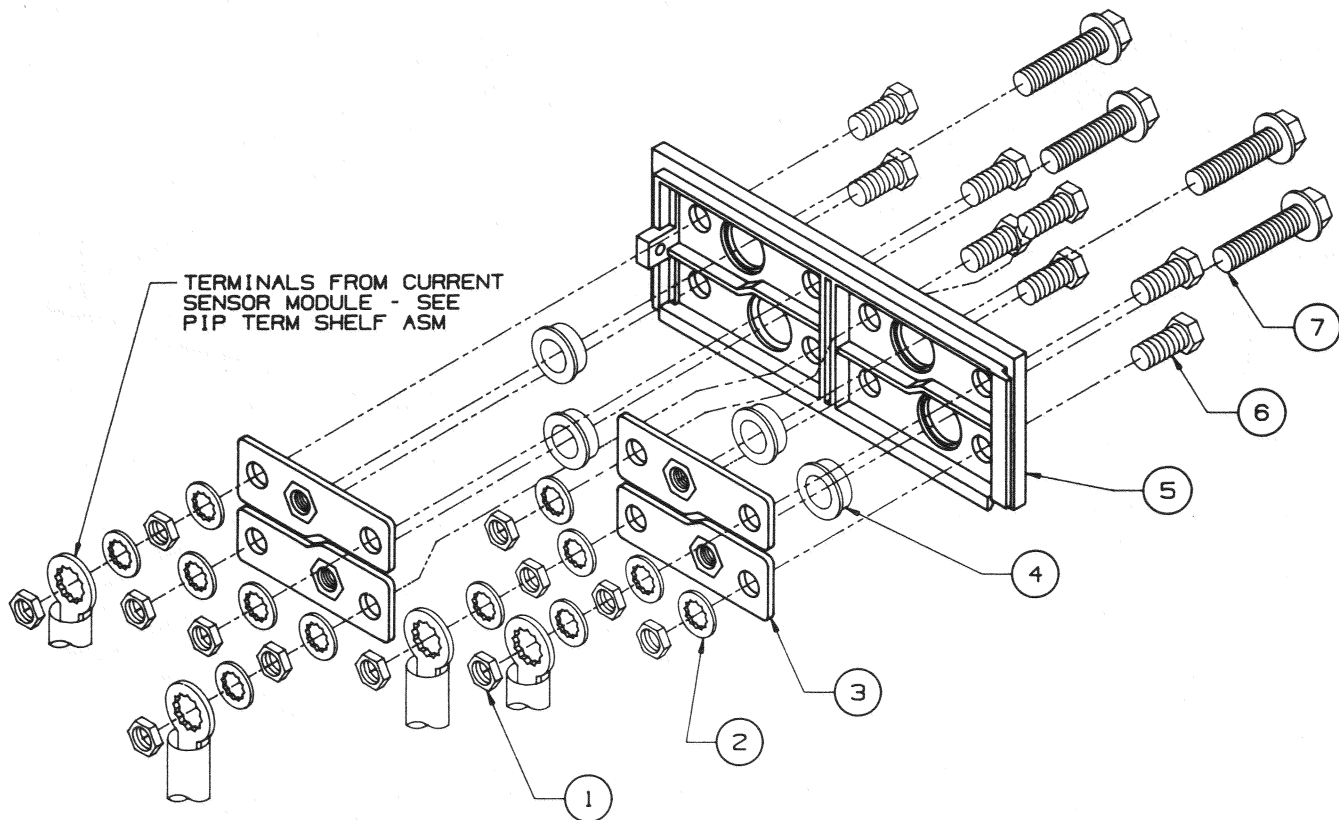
PIP Terminator Shelf Assembly, View "A"
